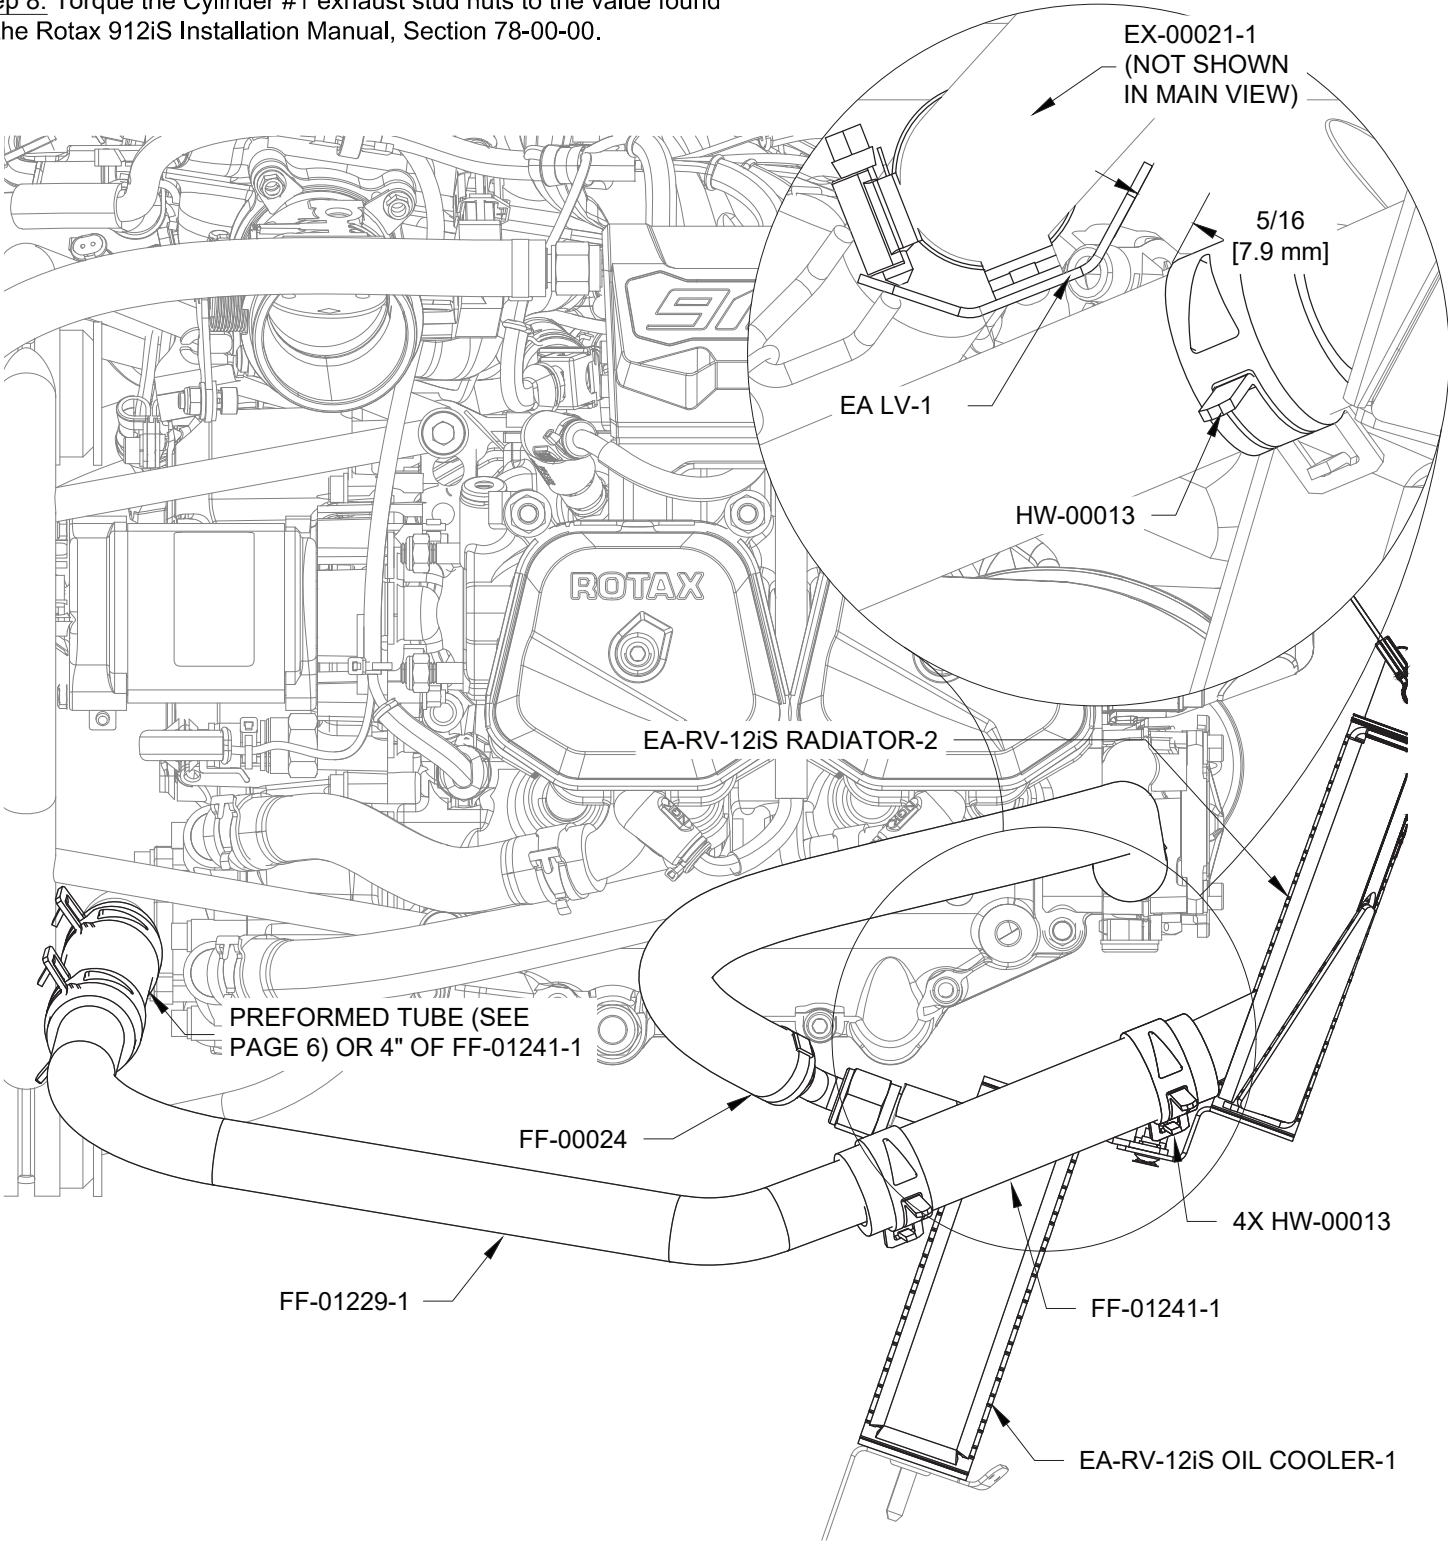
RADIATOR & OIL HOSES - RIGHT SIDE
